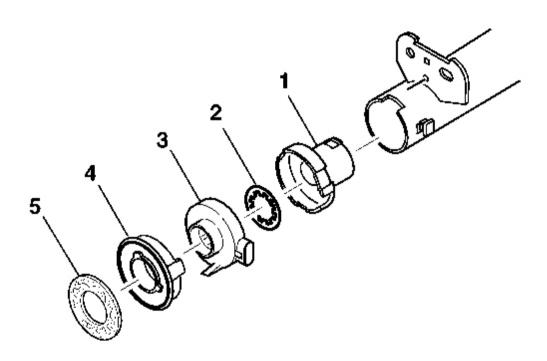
Steering Shaft Seal, Sensor Retainer, Sensor Assembly, Lower Spring Retainer, Adapter & Bearing Assembly (Telescoping)
